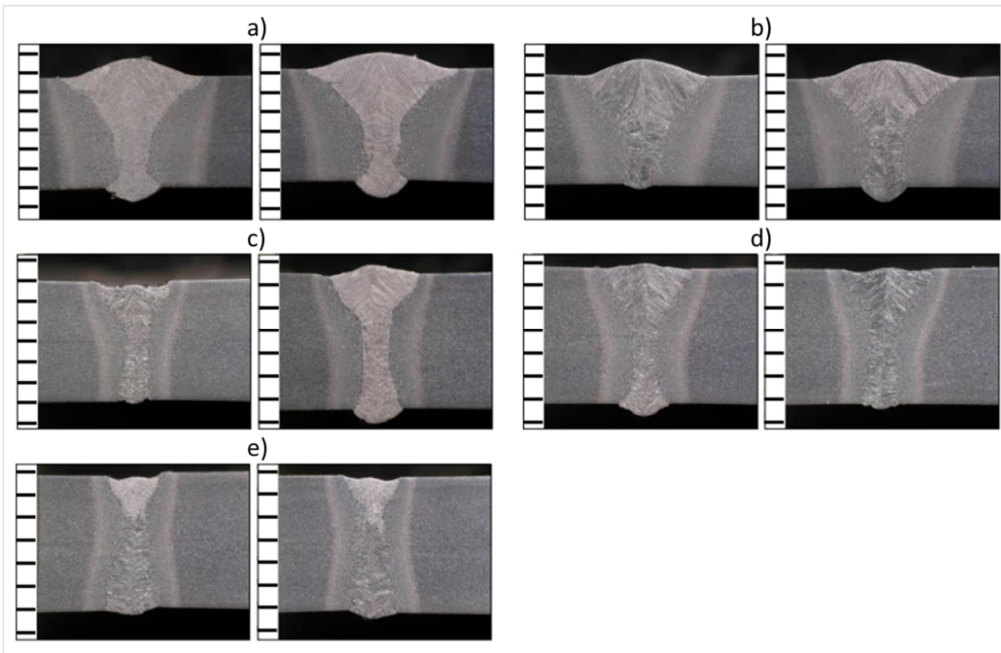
Cross-sections of butt joints: a) GMA weld with filler metal OK 12.51 (G42 4 M20 3Si1), b) GMA weld with filler metal X96 (G89 5 M21 Mn4Ni2.5CrMo), c) laser- hybrid weld with filler metal OK 12.51 (G42 4 M20 3Si1), d) laser-hybrid weld with filler metal X96 (G89 5 M21 Mn4Ni2.5CrMo), e) laser weld. The scales are in 1 mm increments.
